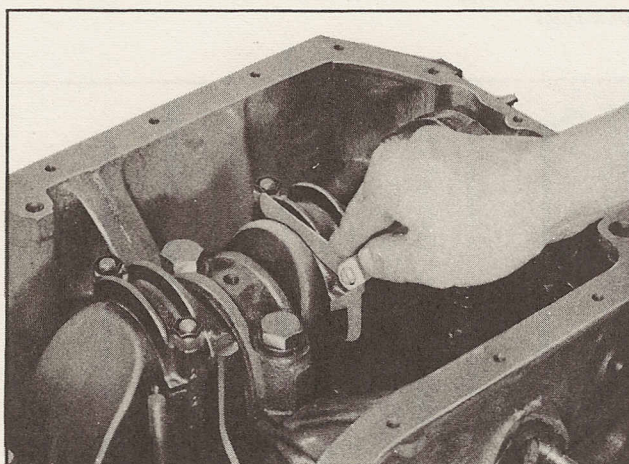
Measuring Thrust Clearance of Connecting Rod
